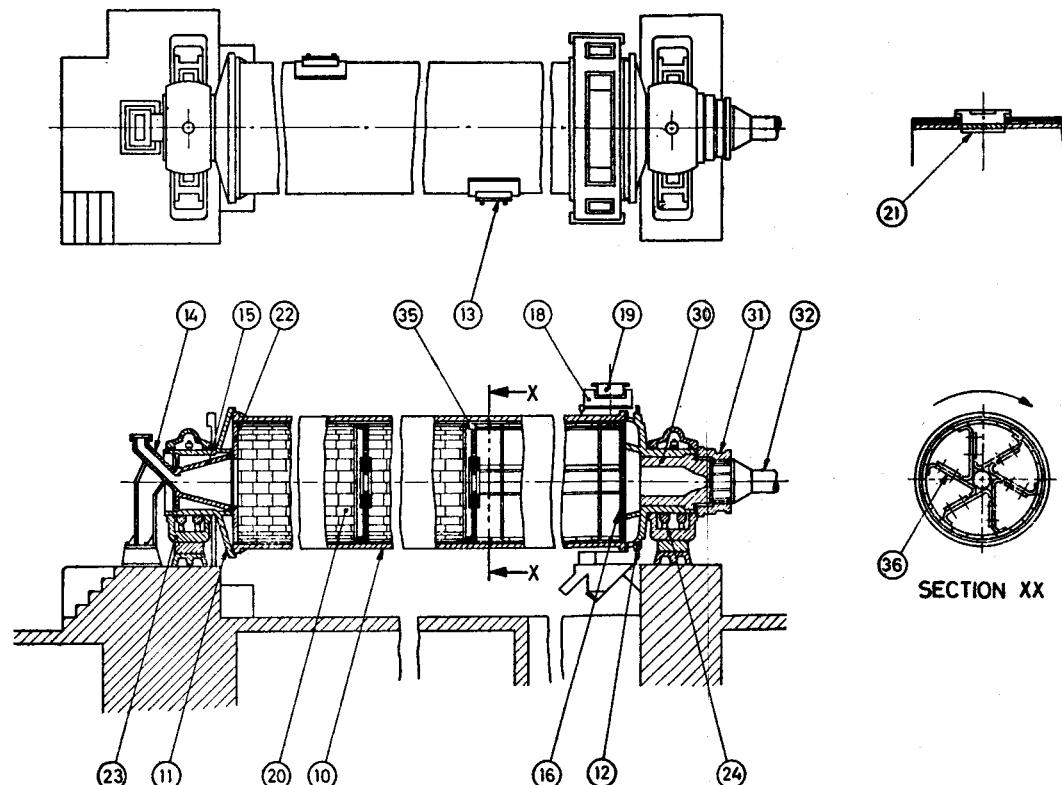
NOMENCLATURE OF MULTI-COMPARTMENT TUBE MILL
